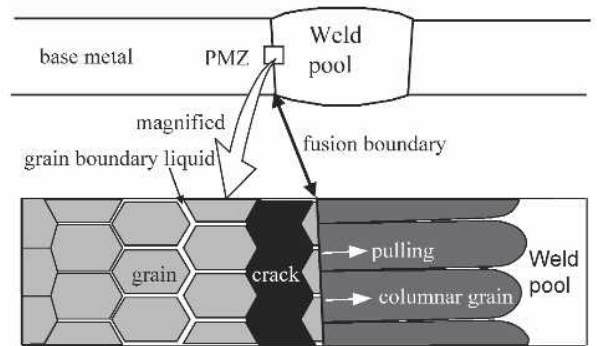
A schematic diagram illustrating the mechanism of liquation cracking in full-penetration aluminum welds.^[67]
